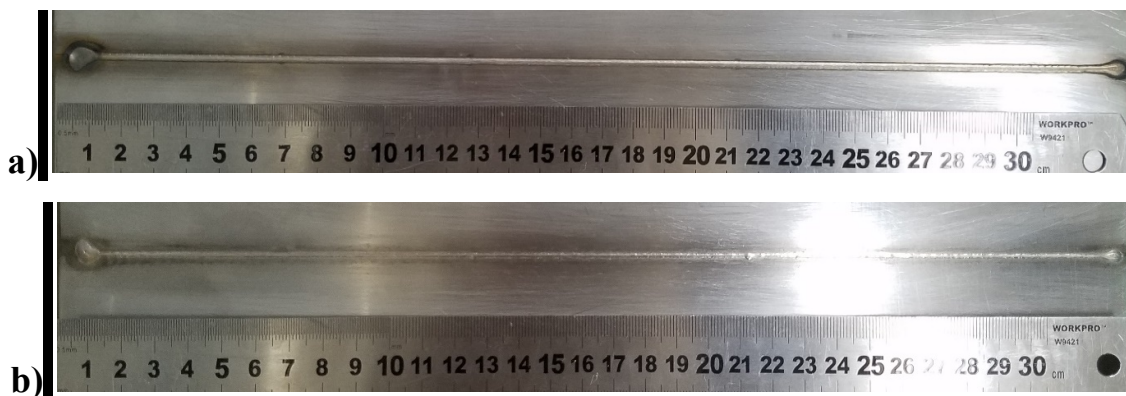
General view of the butt welded joint of SUS304 steel ($\delta=1$ mm) obtained by laser-microplasma welding: a) – top side; b) – the root of the seam.
